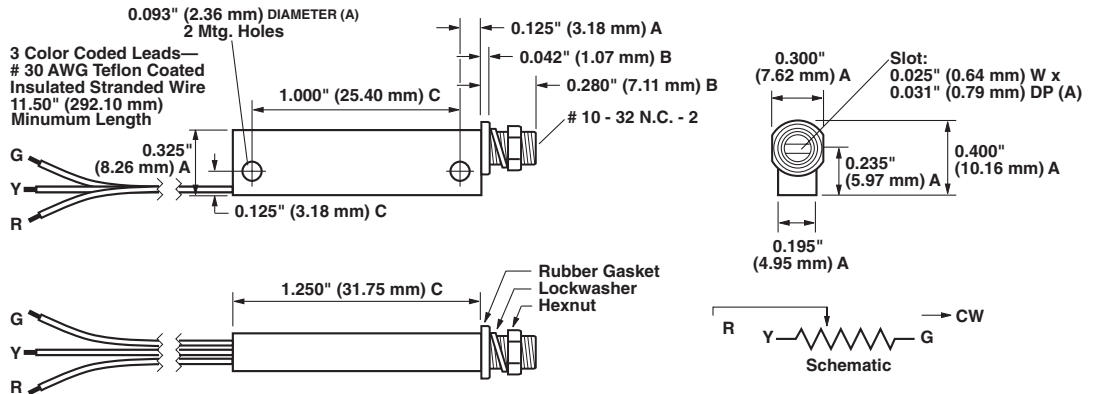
SCHEMATIC AND DIMENSIONS in inches (millimeters)
